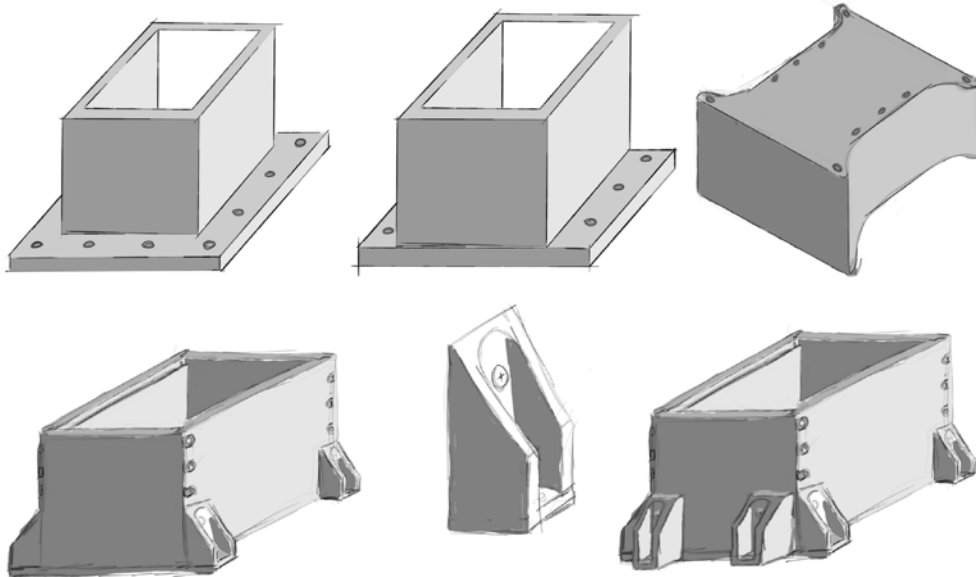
Base Mounting: Extended base on four sides, extended base on two sides, hybrid corner connection, mounting flanges on two sides, example mounting flange, mounting flanges on four sides.
